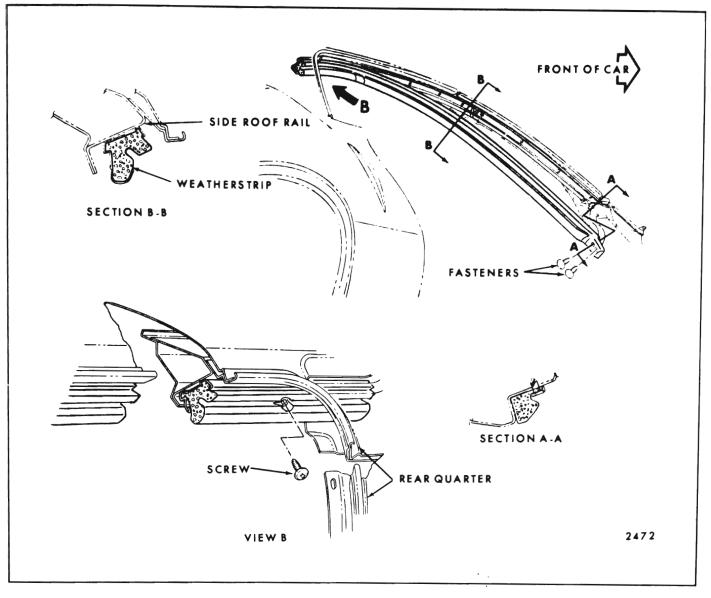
Side Roof Rail Weatherstrip Assembly - "E-47" Styles
